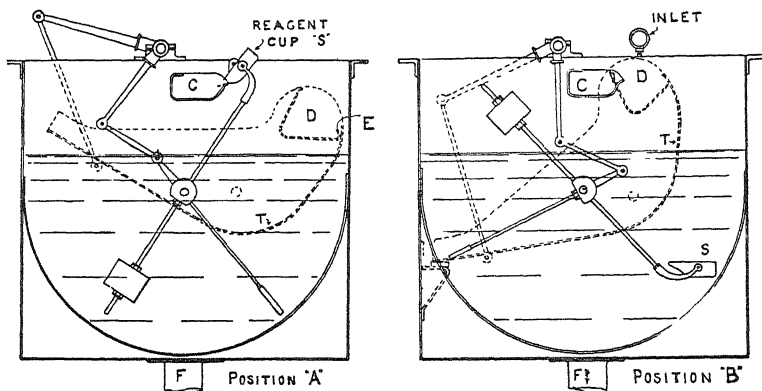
Becco Tipping Bucket and Reagent Gear.
